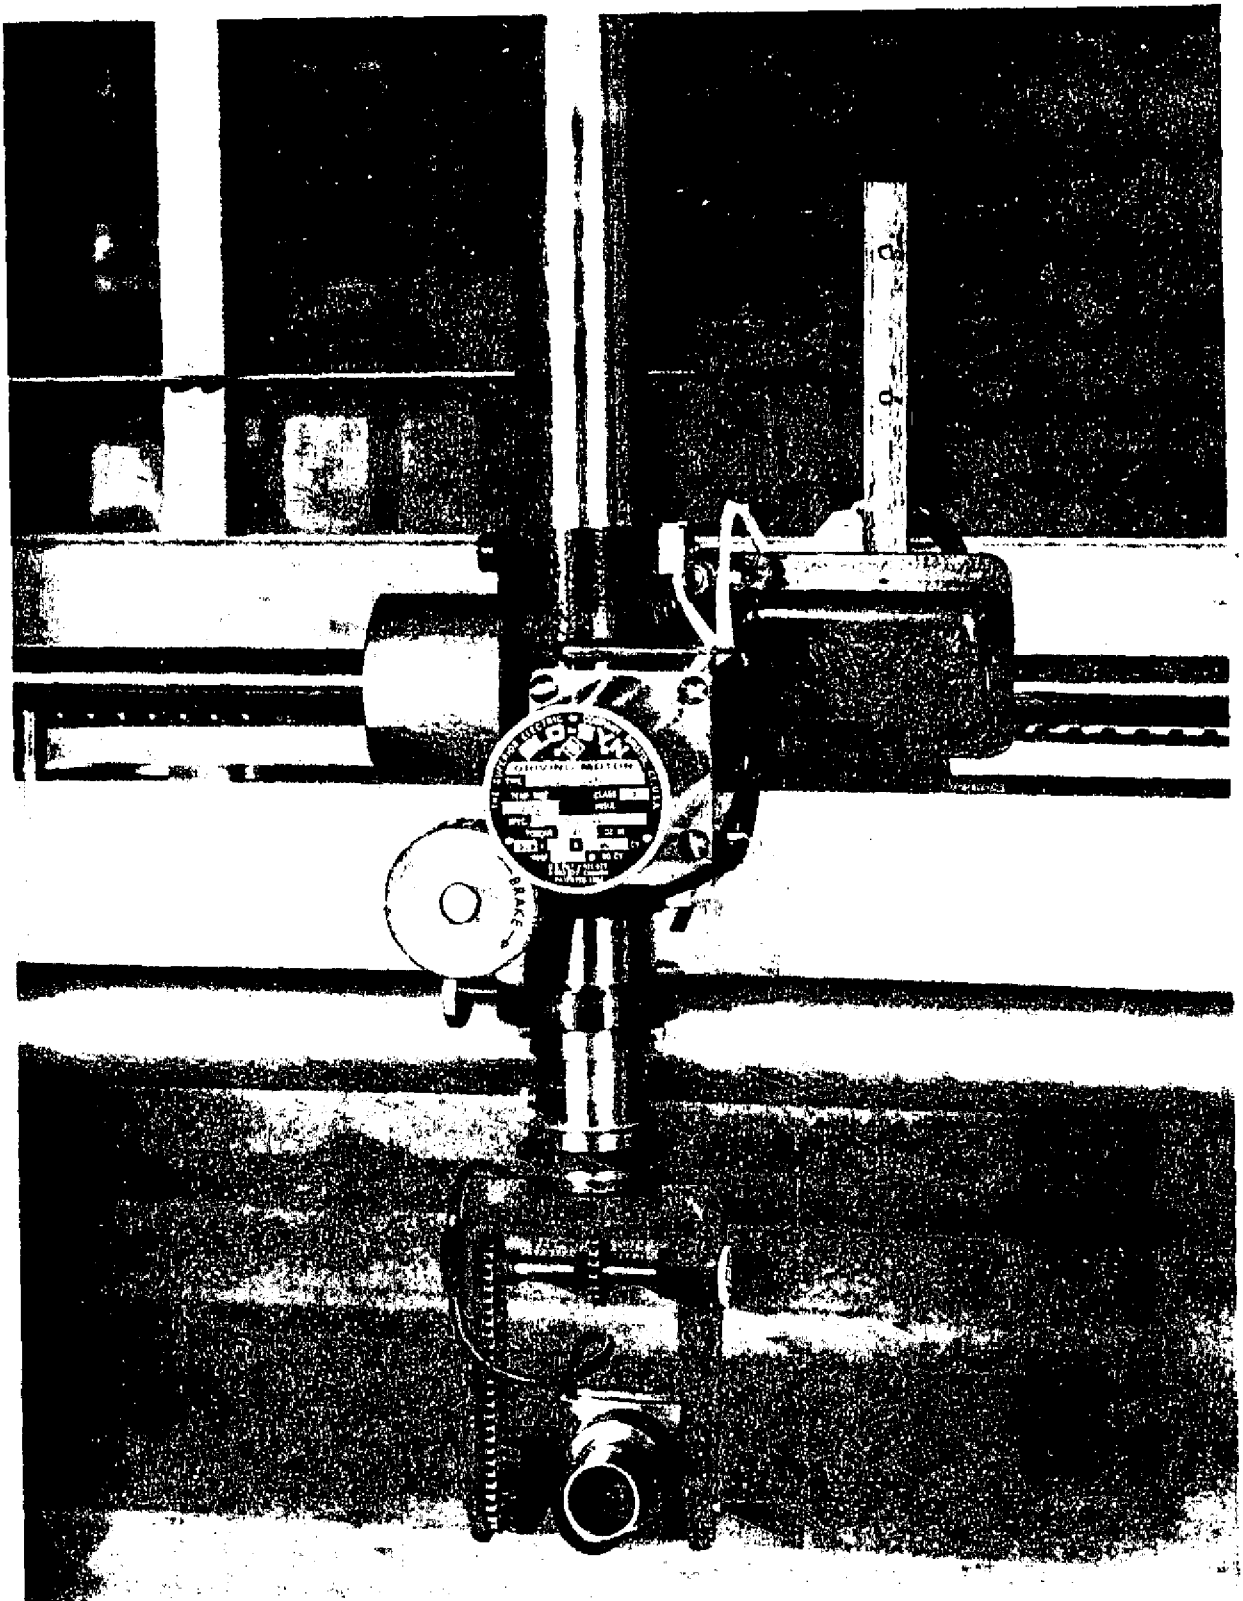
Manipulator, search tube, and transducer (lower view).
